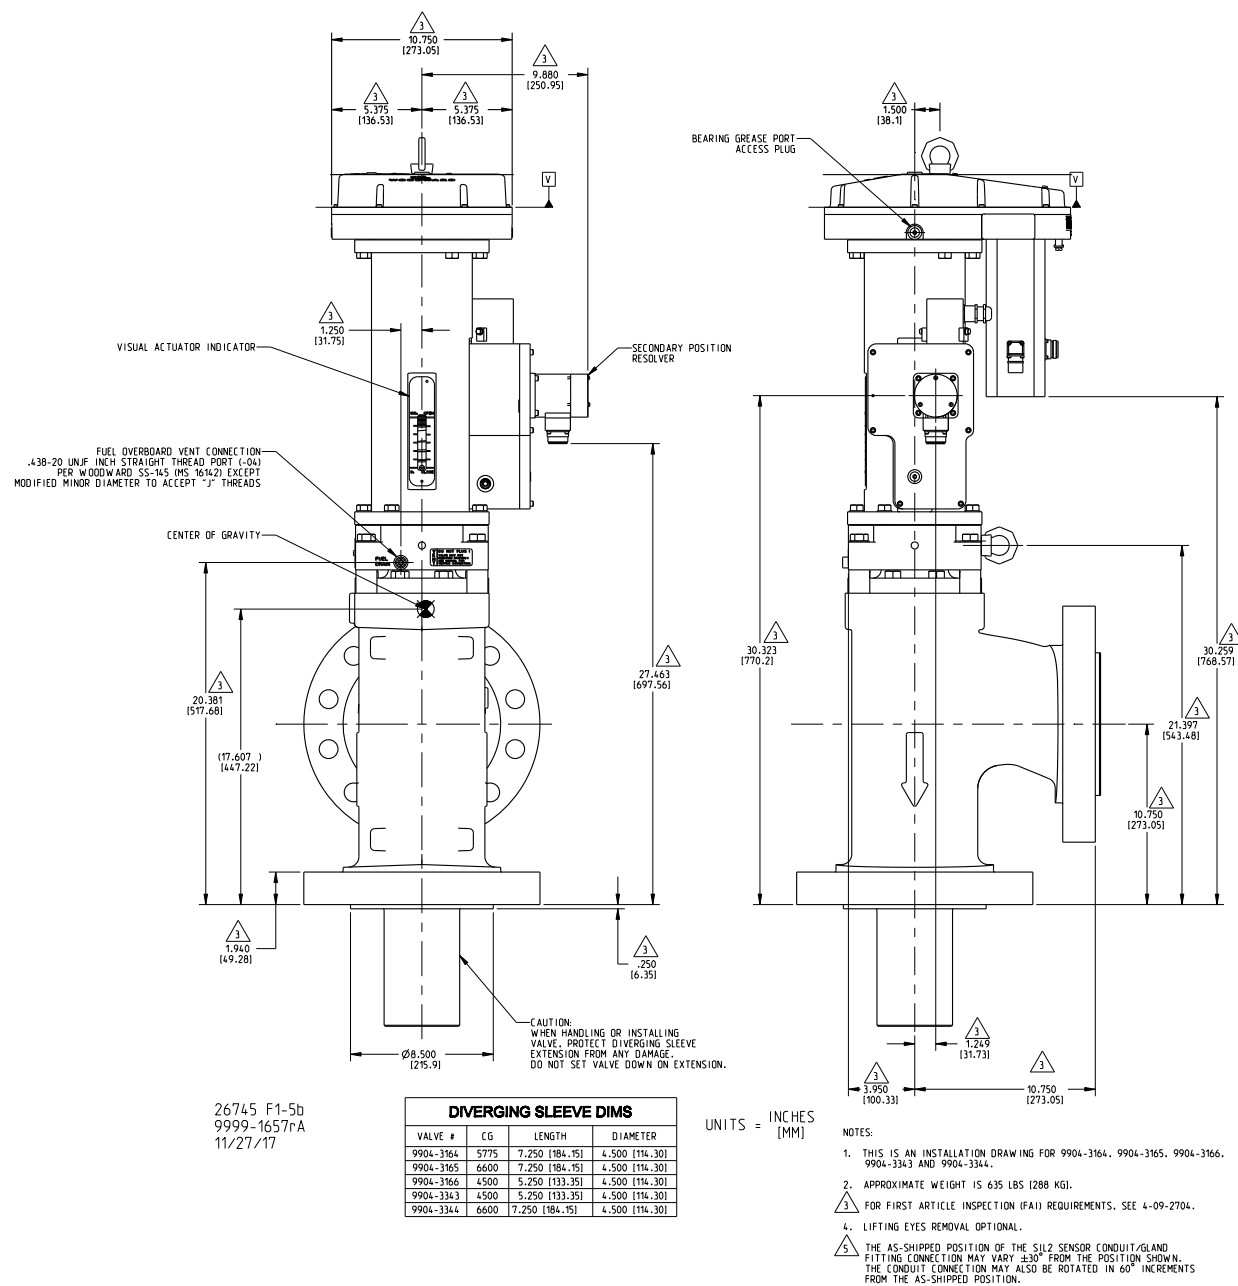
Outline Drawing (6-Inch HR LESV)
